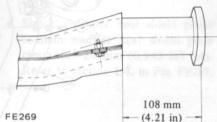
Mounting position of exhaust front tube heat shield plate
